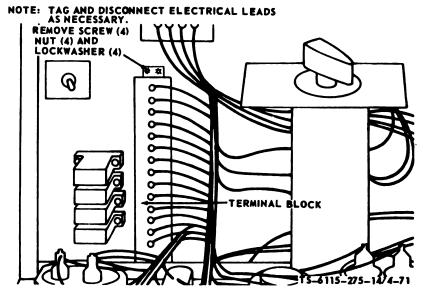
Terminal block, removal and installation (Model MEP-023A).
